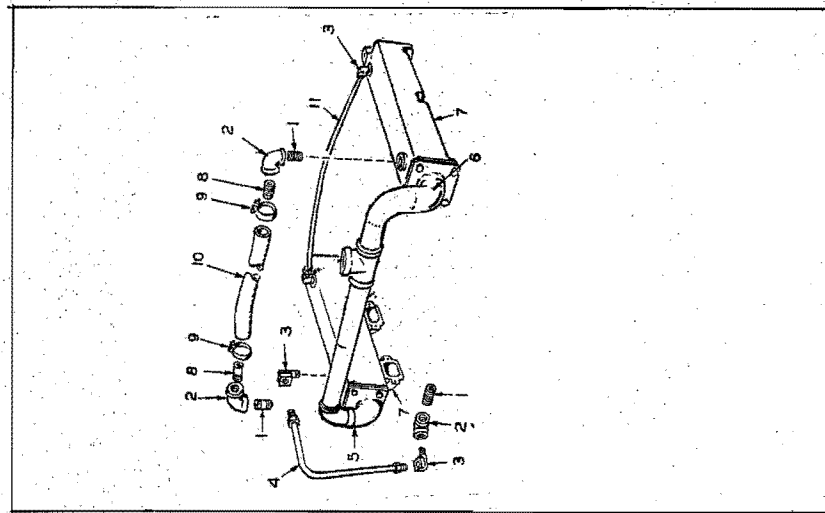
WATER COOLED MANIFOLD GROUP (RADIATOR COOLING)
